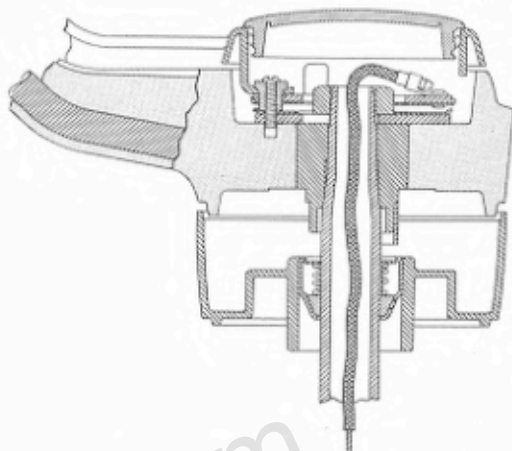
WITH CONVENTIONAL STEERING GEAR
